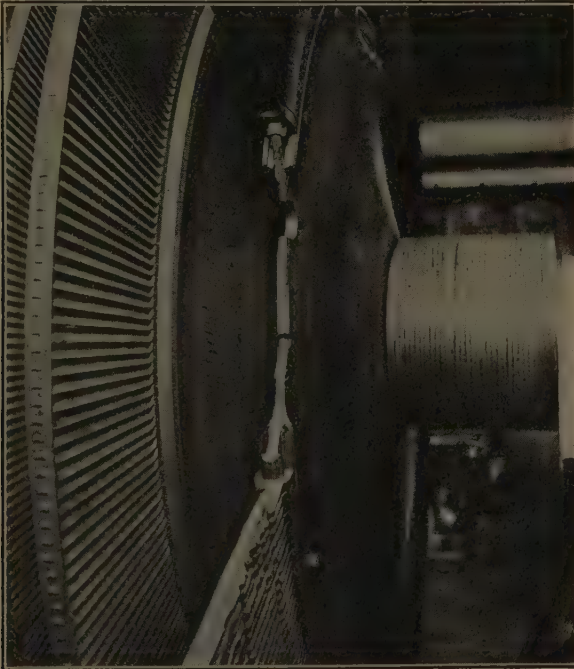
DETAIL OF FRACTURE SHOWING CHARACTERISTIC FATIGUE FAILURE
